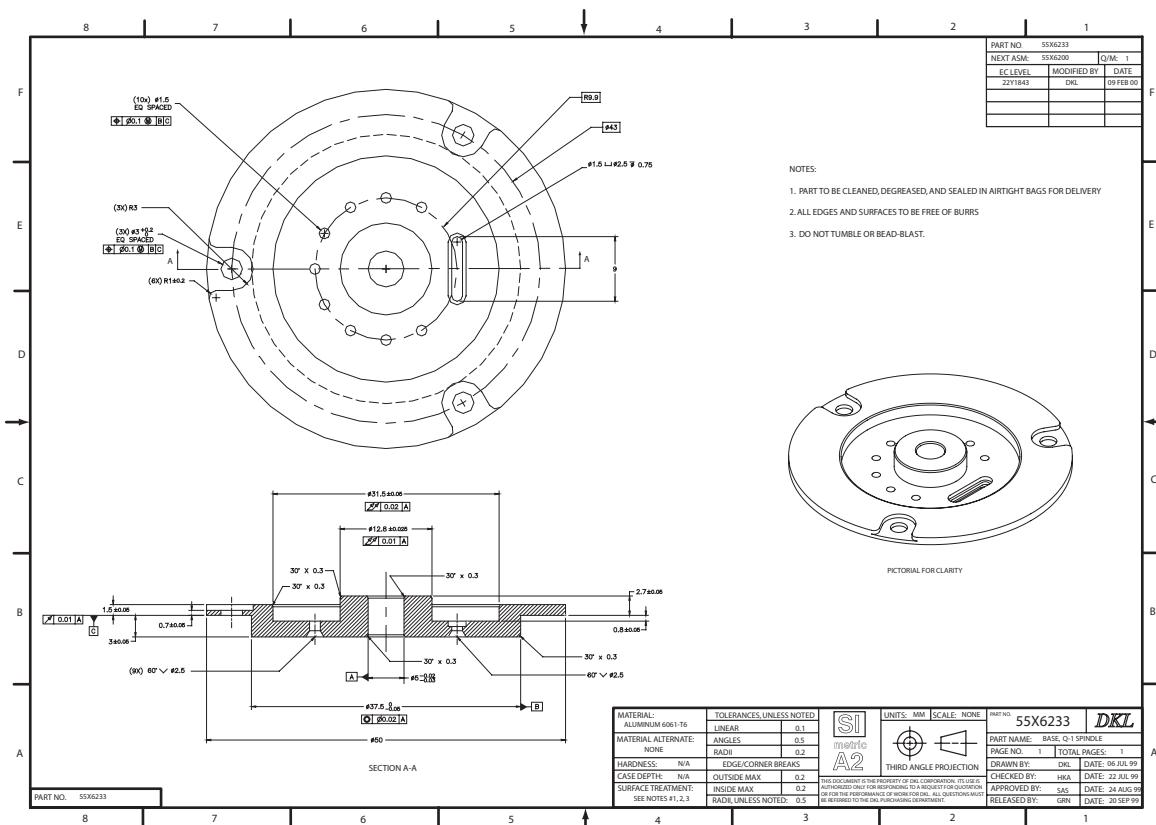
Working drawings for the computer disk drive spindle.
